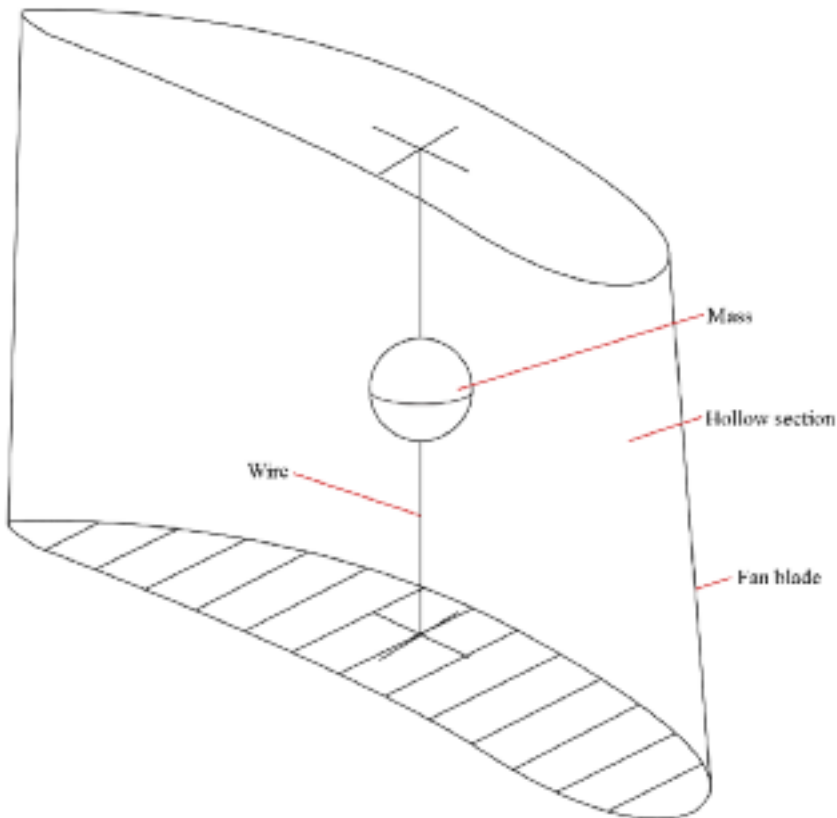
A schematic cross-sectional view showing the blade's hollow interior, illustrating the damping mass location and its wire support within a blade's hollow section.
